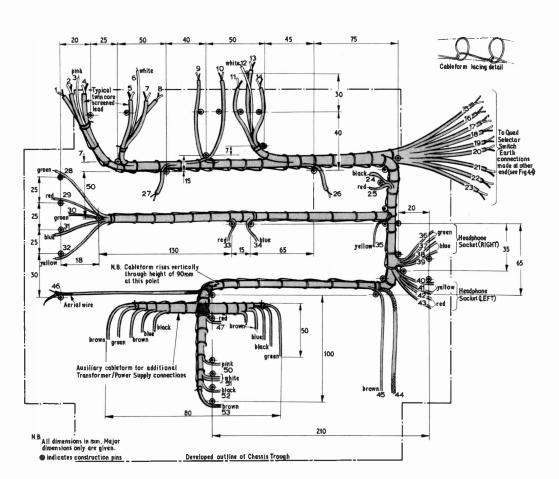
Details of the cableform wiring harness. Interwiring between the units is greatly simplified if a cableform system is constructed as shown here
